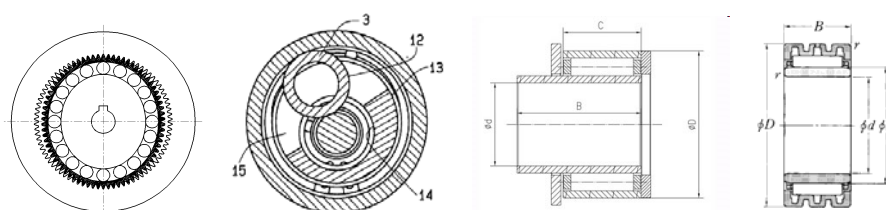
Harmonic gear drive, planetary traction drive [3], spring roller bearing and needle roller bearing with clearance adjustment
